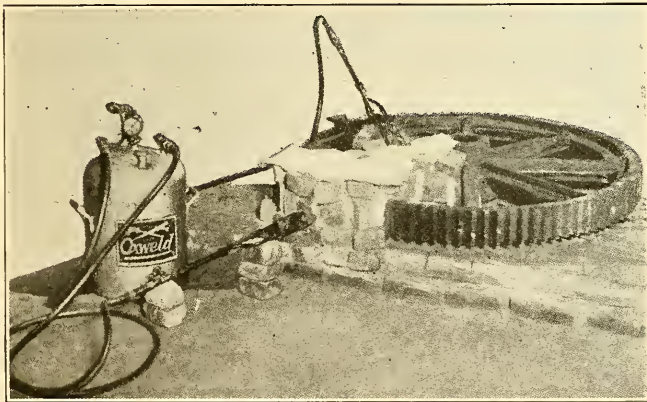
Using Two Burners to Preheat a Large Gear.
